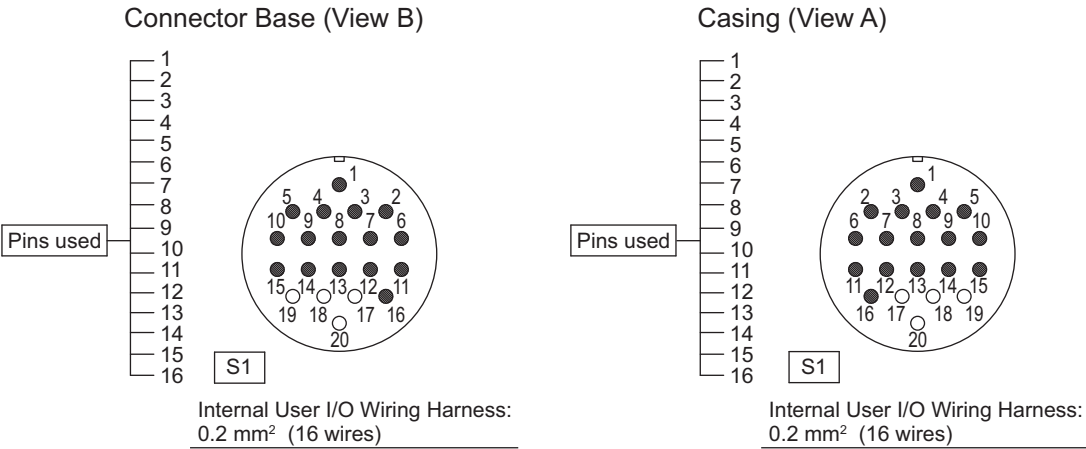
Connectors for Internal User I/O Wiring Harness and Air Hose
